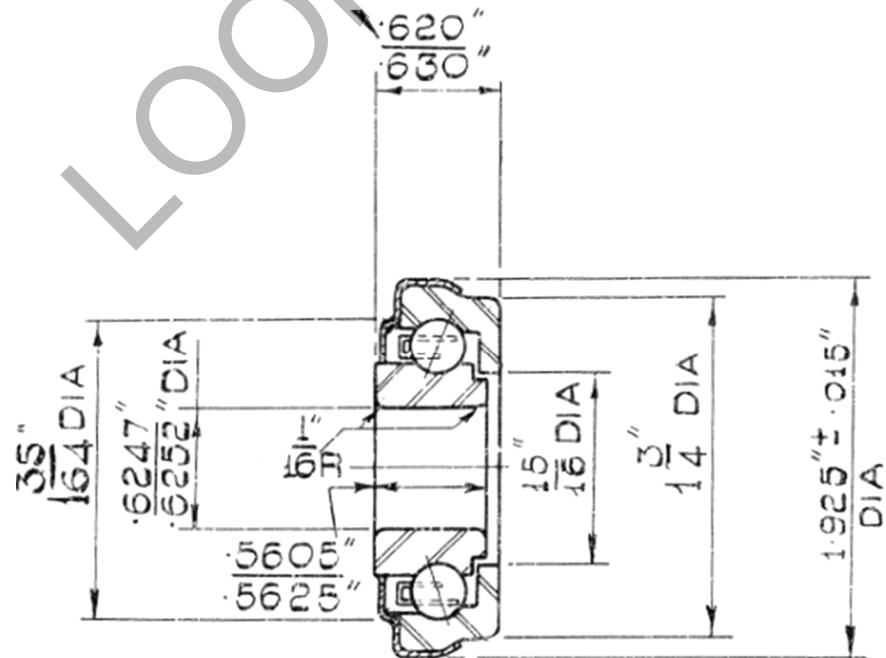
Clutch release bearing 2A3653.
